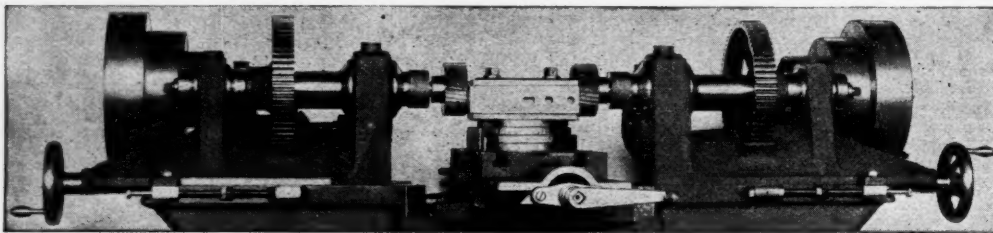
DUPLEX DOUBLE-COLUMN MILLING-MACHINE.
